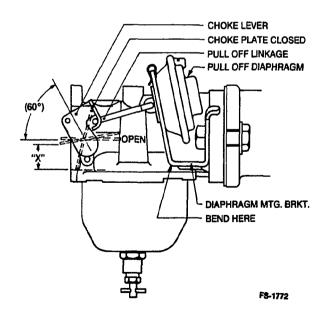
CHOKE PULL-OFF ASSEMBLY
